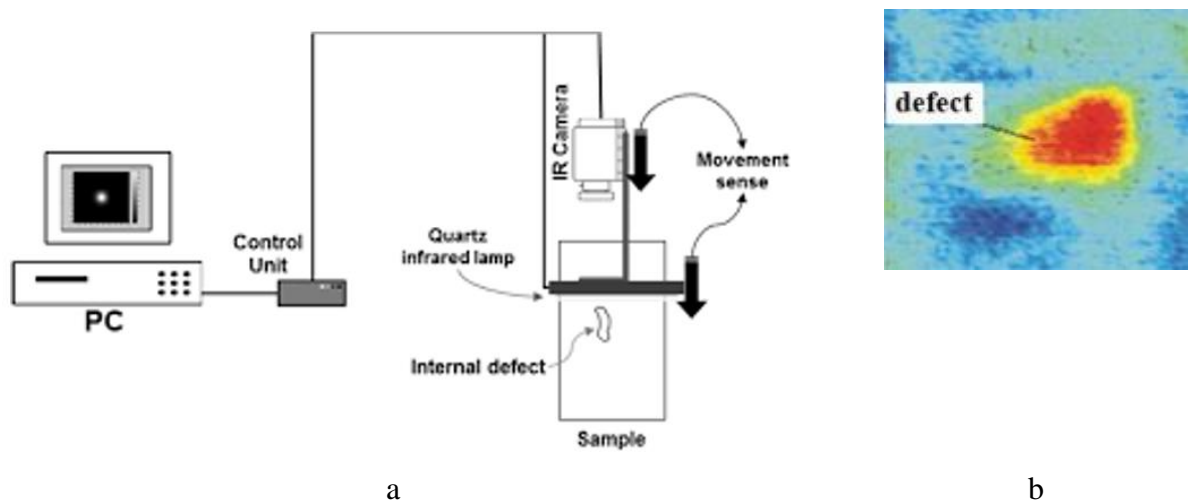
Thermography carbon fiber composites inspection: a – experimental setup of thermographic testing, b – sample from carbon fiber composite material with the defect [22]
